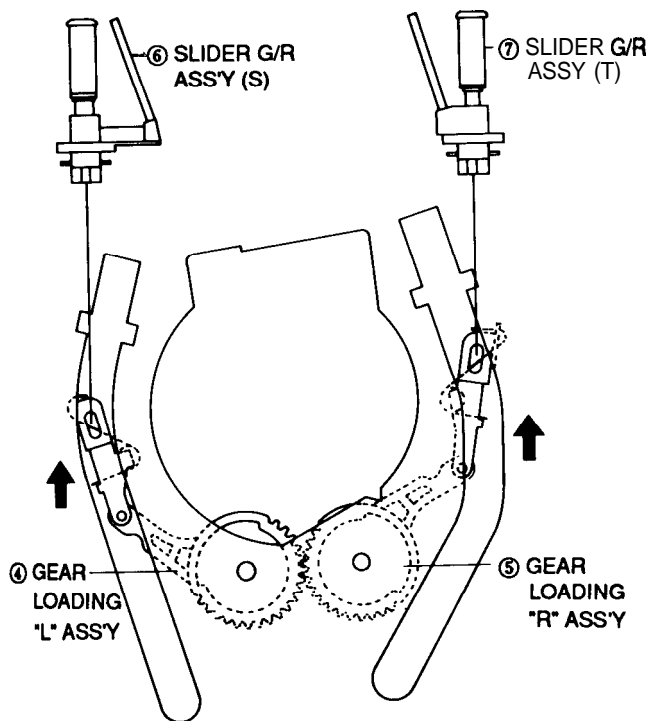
Assembly of Slide Guide Roller "S", "T" Ass'y
